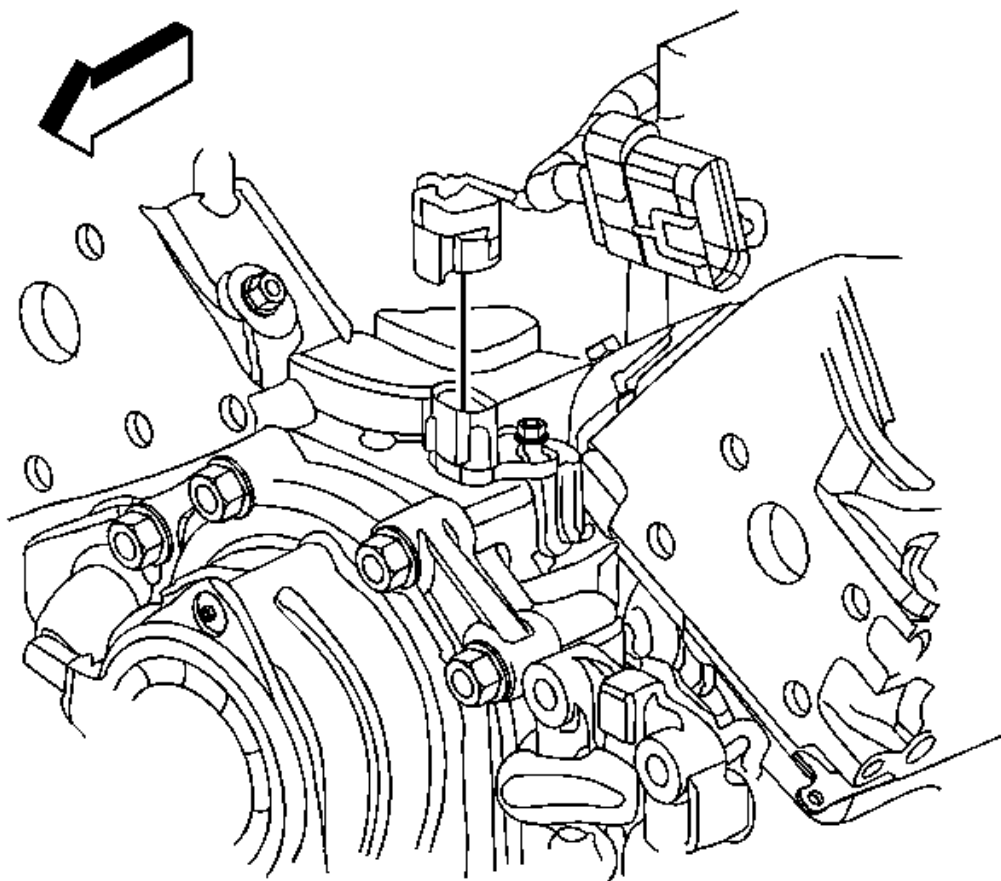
View Of Fuel Injector Wiring Harness Electrical Connector
